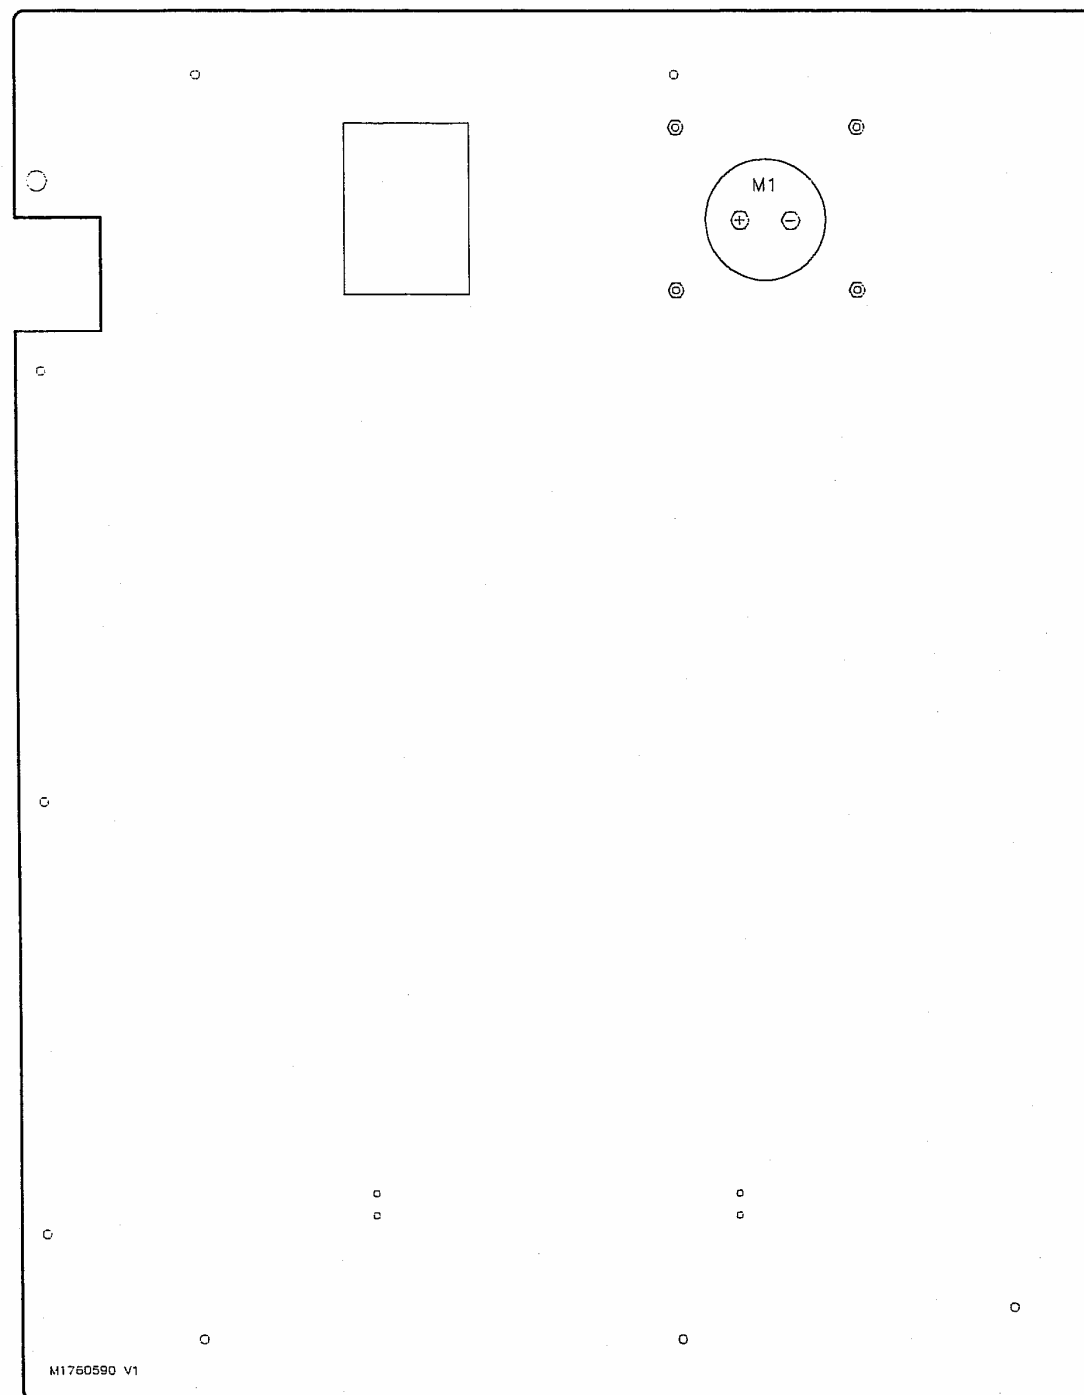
Assembly Detail - Tuning Control Panel (P/N 176-6120-03)
